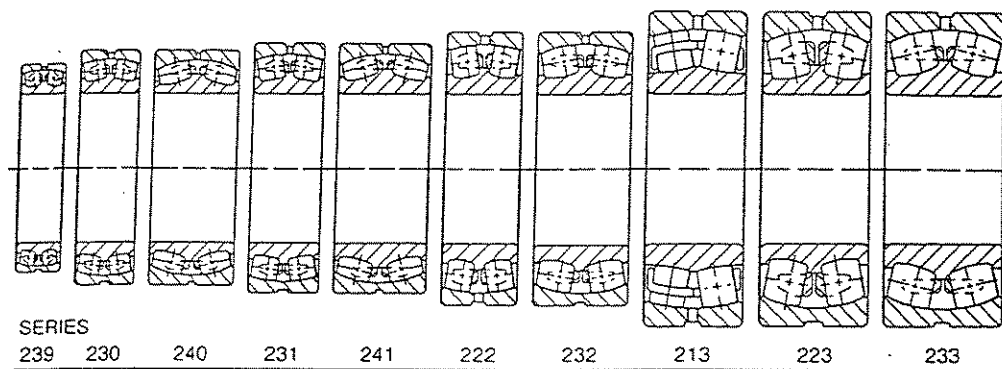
A graphical illustration of the ten dimensional series of spherical roller bearings available conforming to ISO and ANSI/ABMA standards
